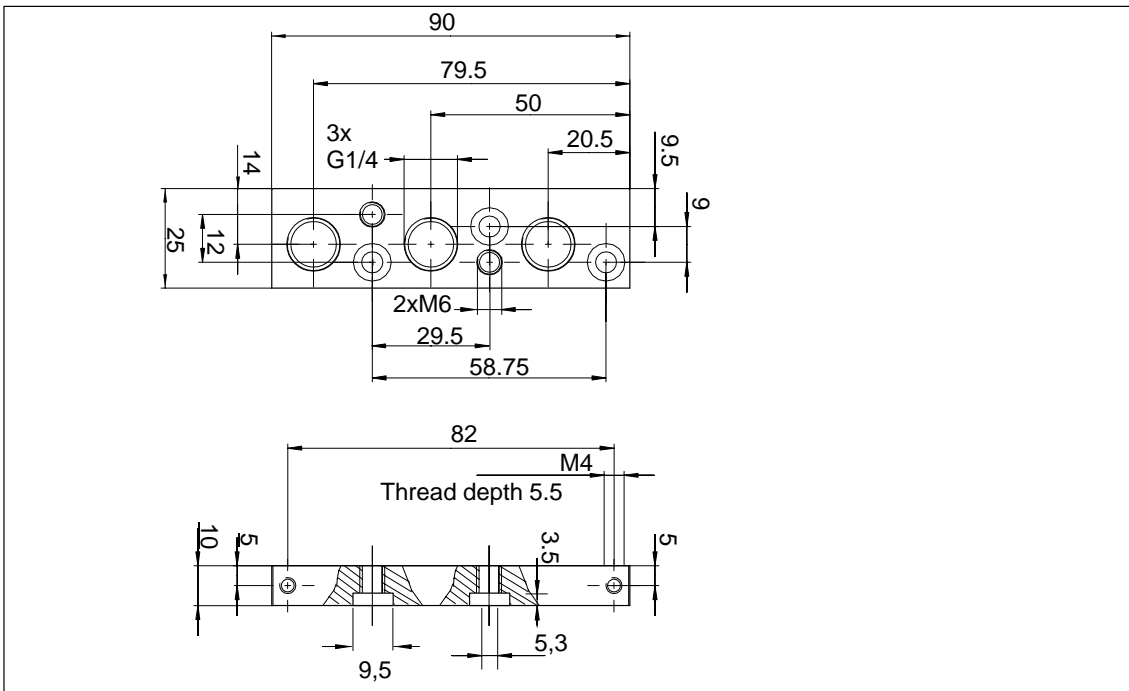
Dimension drawing of terminal block for plastic housing
